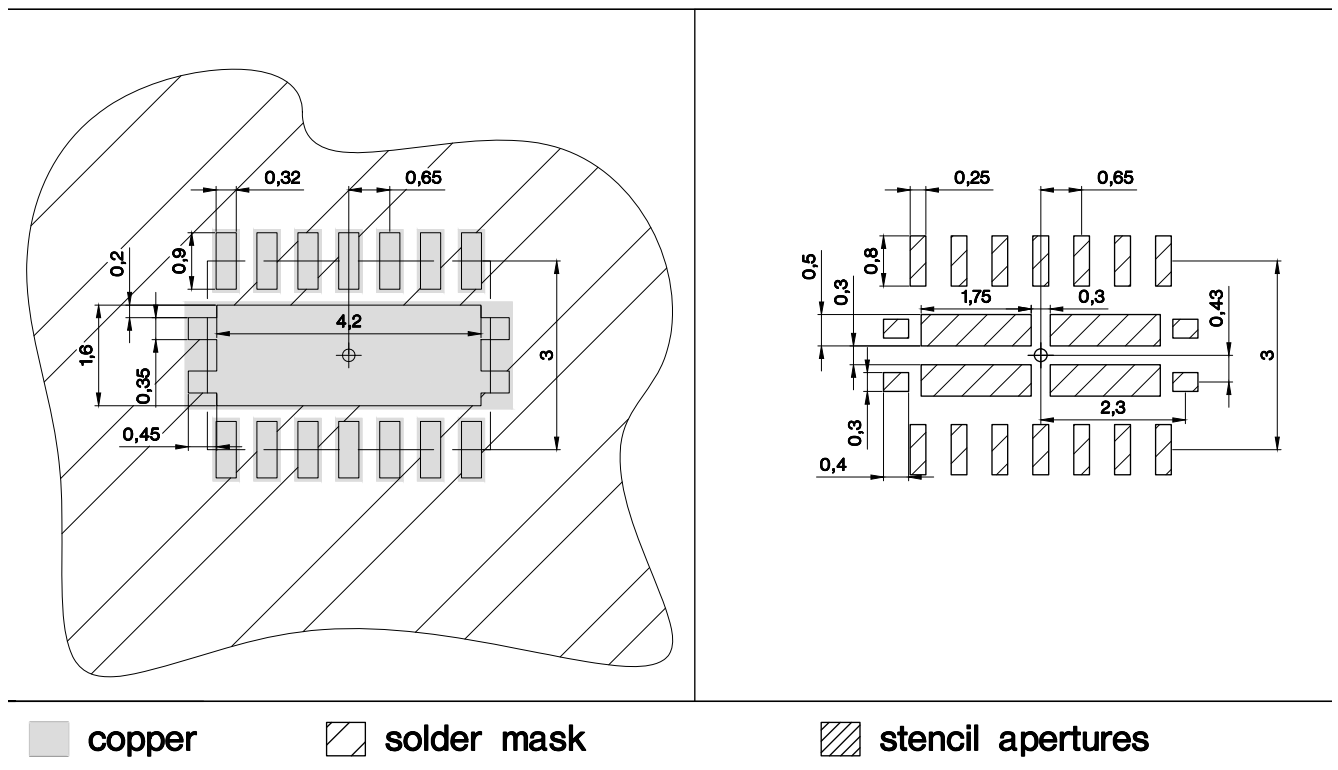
TLE9252V Footprint Dimensions for TSON-14 Package
